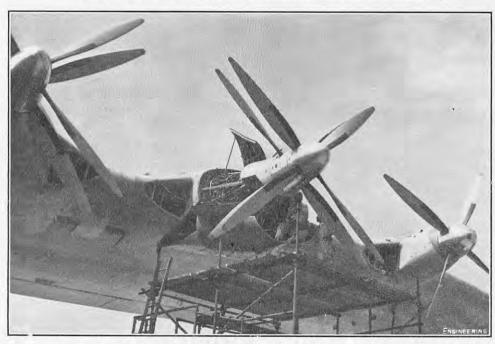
De Havilland Propellers Installed; Engine Cowlings Open for Inspection.
